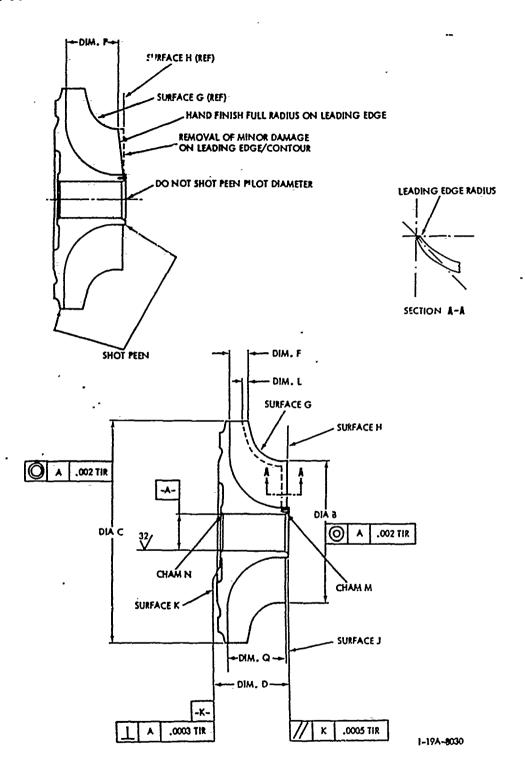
Second Stage Compressor Impeller (Impeller) · Repair
